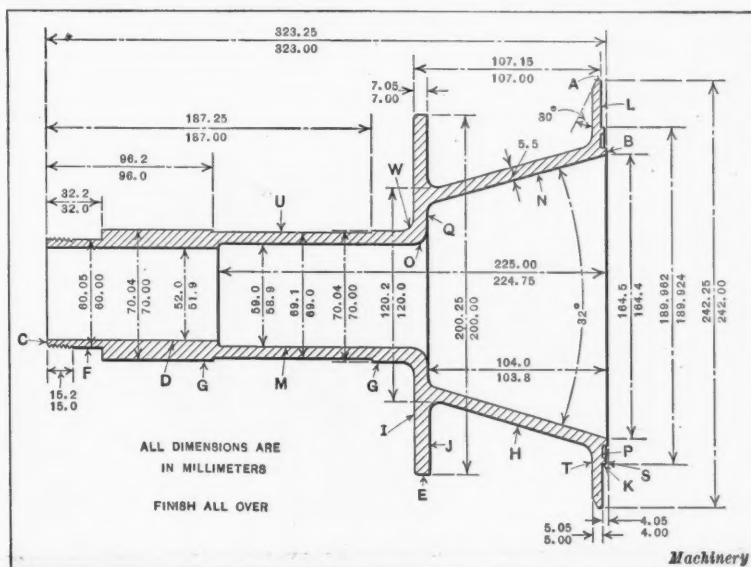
Dimensioned Drawing of Airplane Engine Nose-piece
